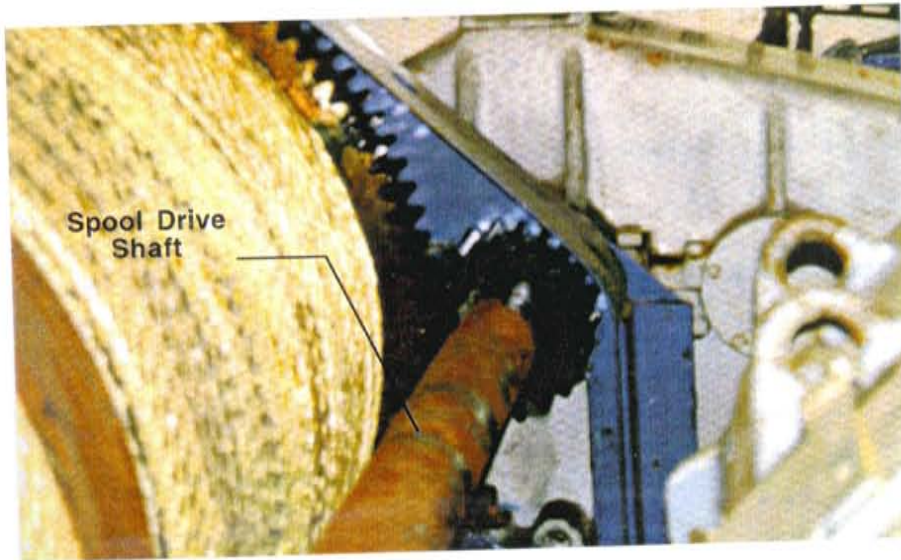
Spool Drive Shaft and Drum In-Situ
